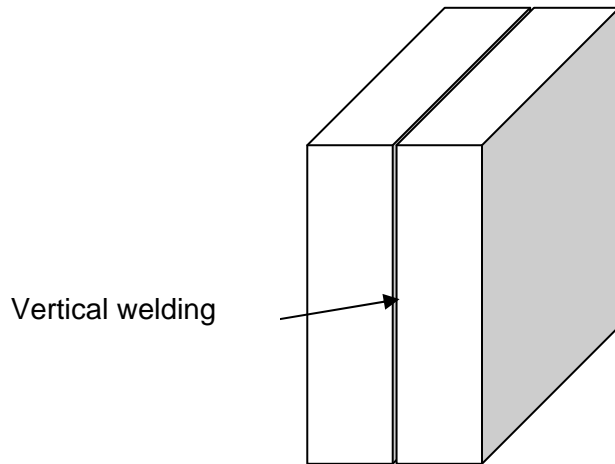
Scheme of placement of components to be welded for vertical welding
